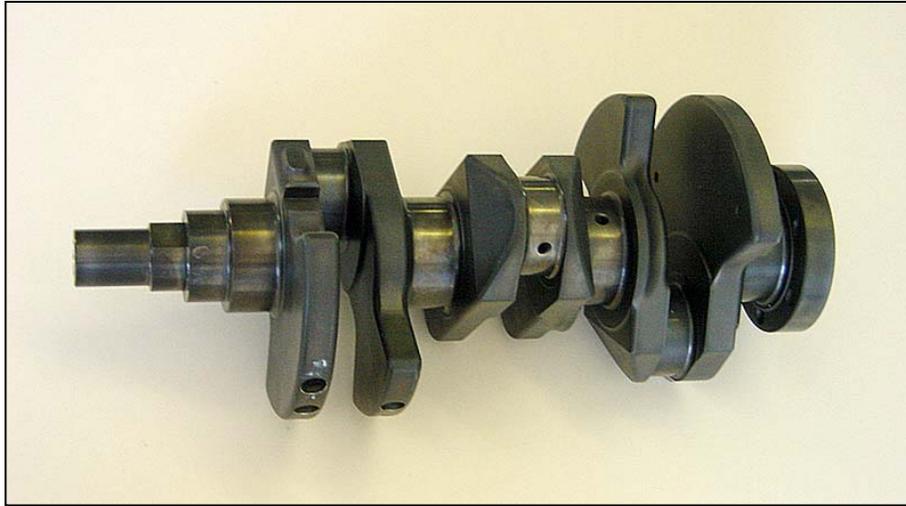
A demonstration titanium – MMC crankshaft weighing 5 kg.
